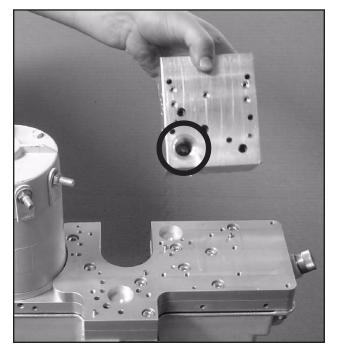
Use needle nose pliers to remove the P.O. Pilot Piston as shown in figure 3-37.
